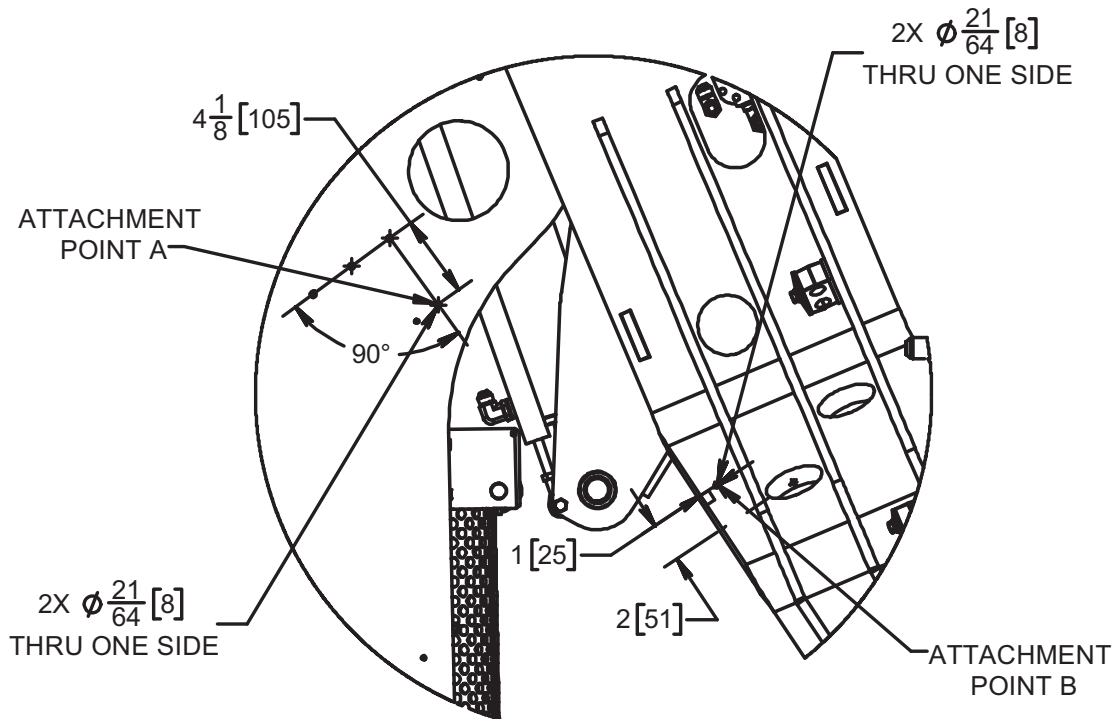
Detail A: TM120-125 Main & Jib Boom Drill Hole Locations
